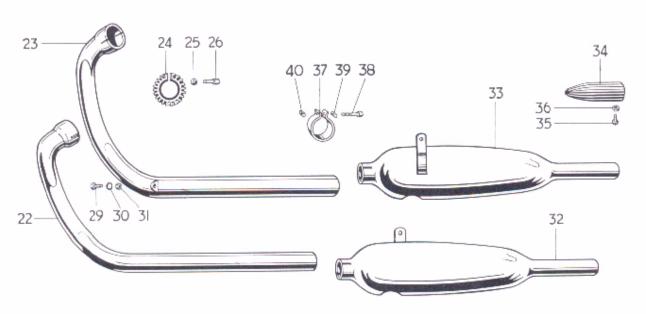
ENGINE FITTINGS AND EXHAUST SYSTEM.
